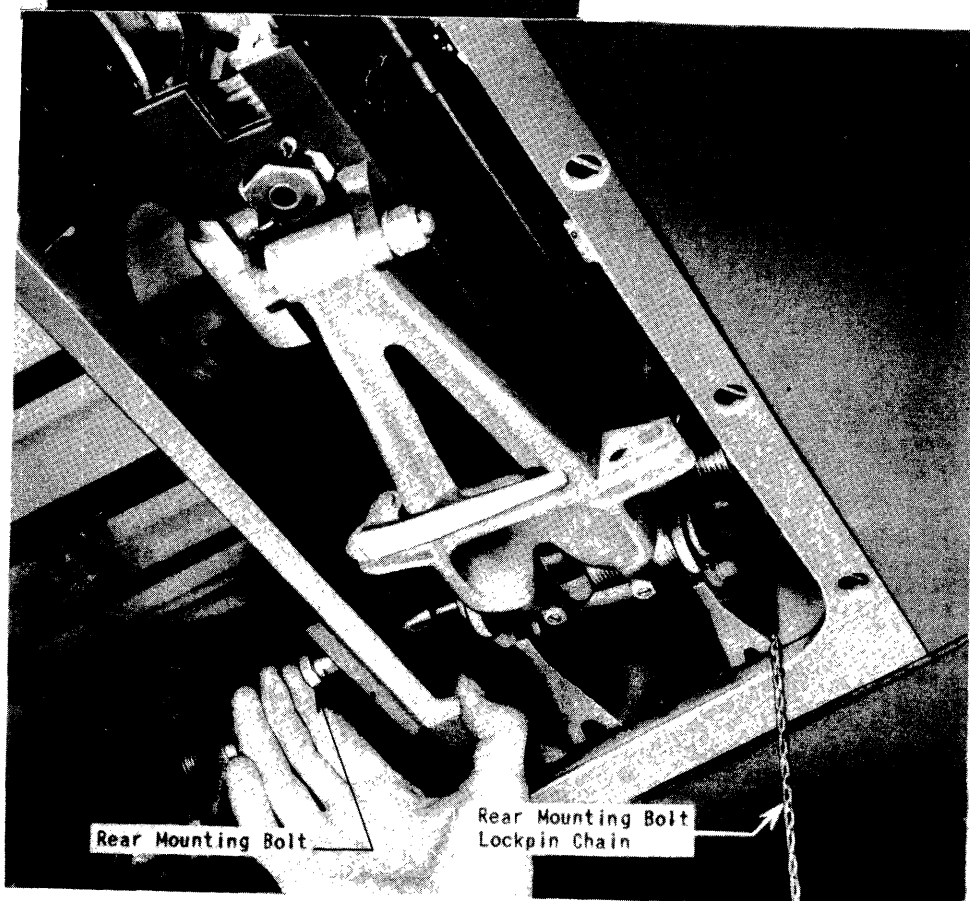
Installing Rear Mounting Bolt in Outboard Gun
